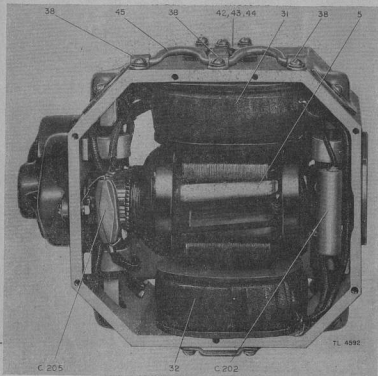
Generator GN-44 A, bottom plate removed—bottom view.
